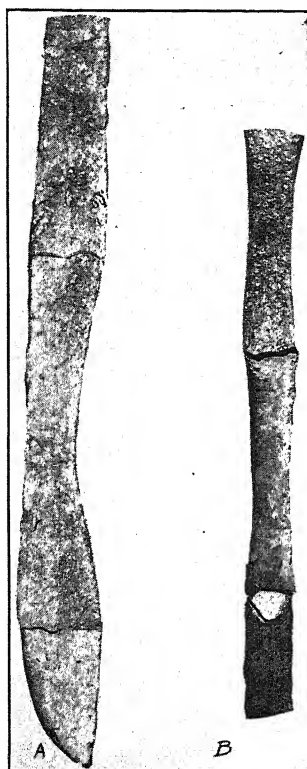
LONGITUDINAL SECTION OF Mo-7 TESTED AT 300° C.; A AT POINT OF FRACTURE AND B ABOUT $\frac{3}{4}$ IN. FROM POINT OF FRACTURE.
